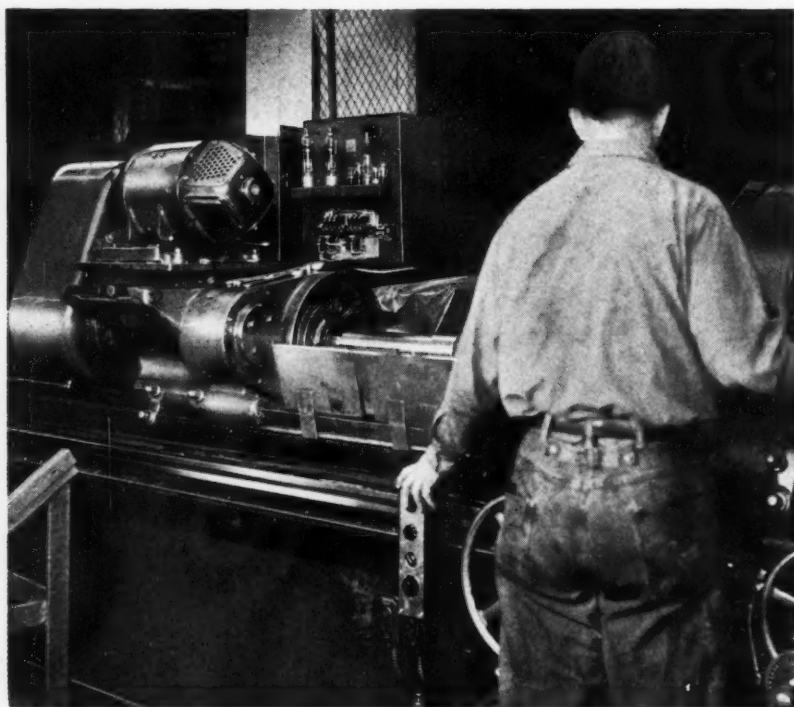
Lathe Equipped with Reliance Electronic Drive
